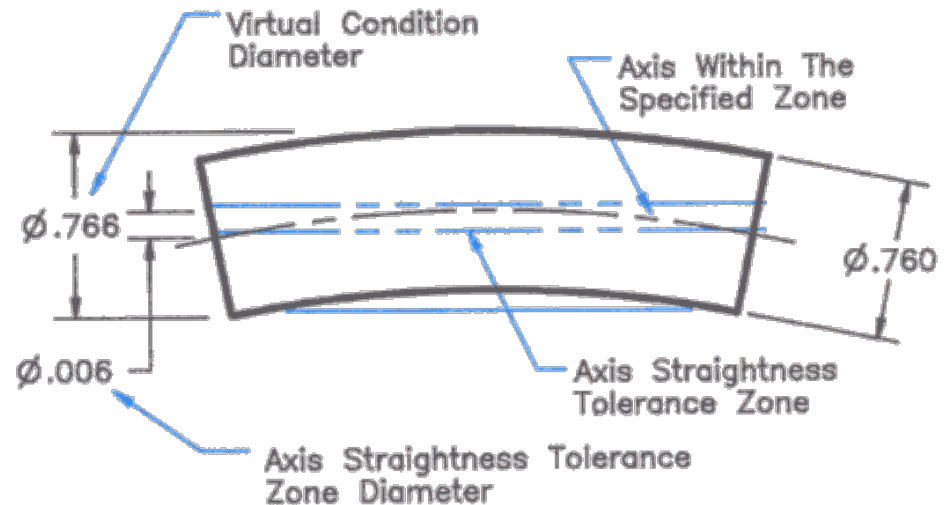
A straightness tolerance applied to control axis straightness permits the part to have an axis straightness error when the part is at MMC.
